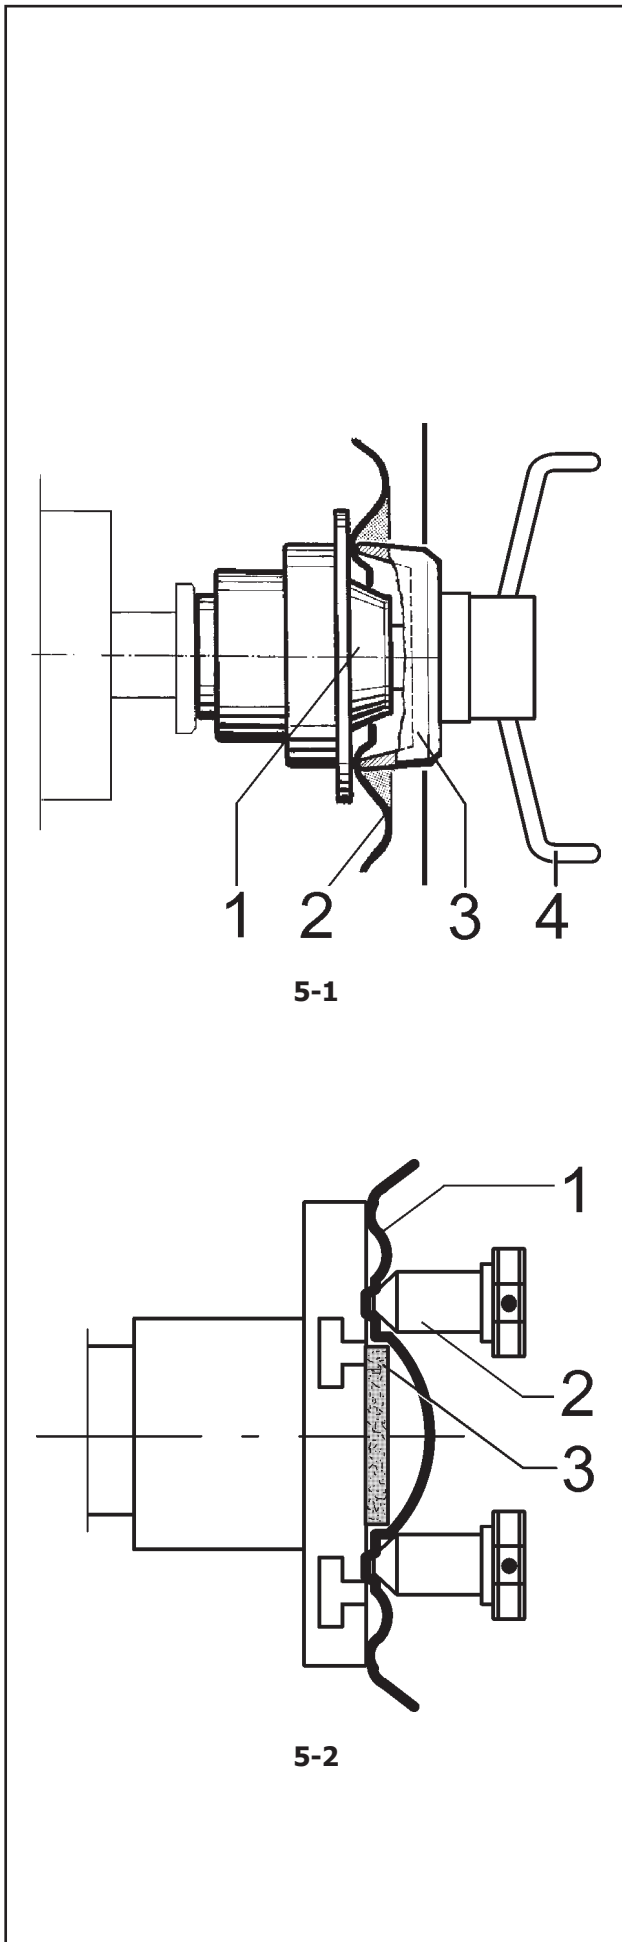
Clamping adaptor to clamp centre bore car wheels.
